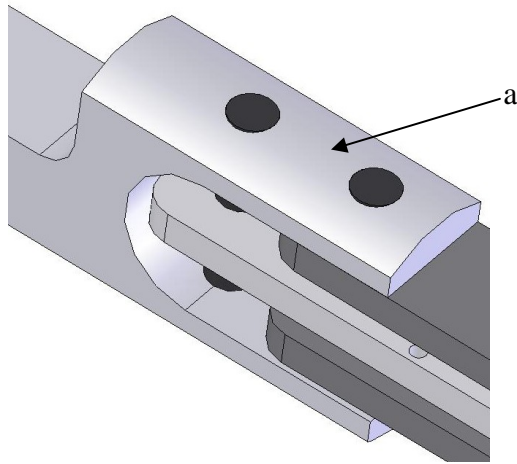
Assembly of paddle. The screws that are inserted into these holes to secure the fingers must have the heads ground off to the surface of the linkage (a) so that the tool fits properly through the trocar.
